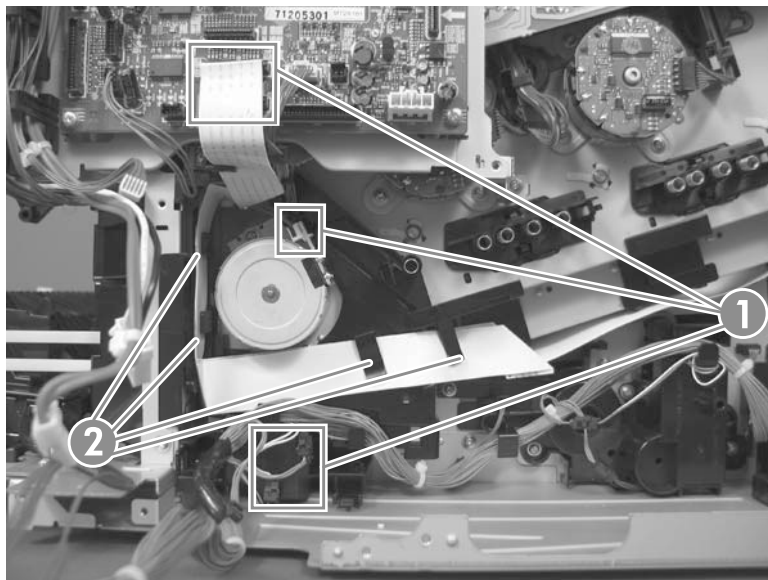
Remove the tray-pickup drive assembly (4 of 10)
